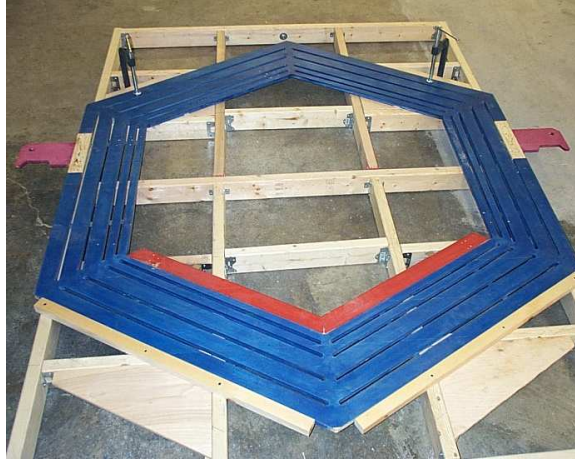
At this point, the steel frame has been welded and is mounted on the steel frame. It is inspected, cleaned, marked, and prepared for assembly.
